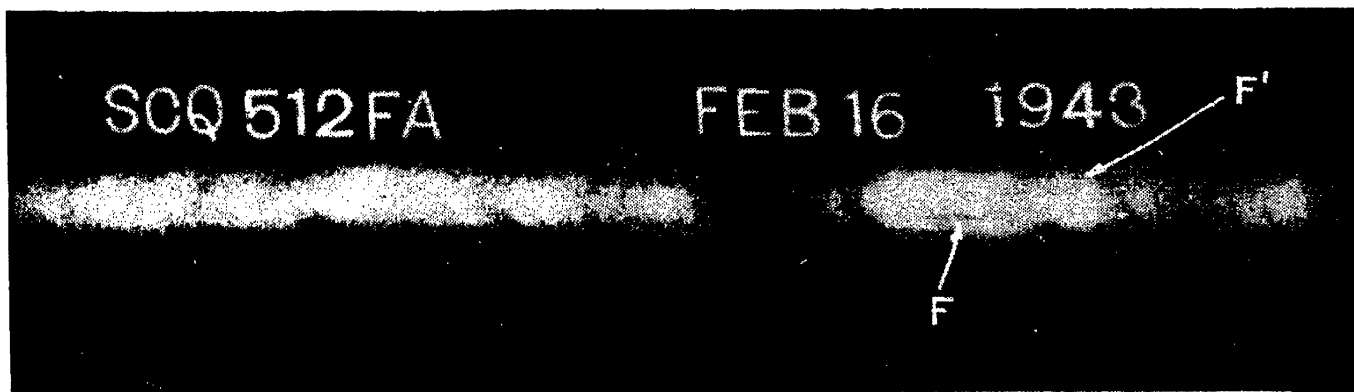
Localized incomplete fusion in arc weld.
